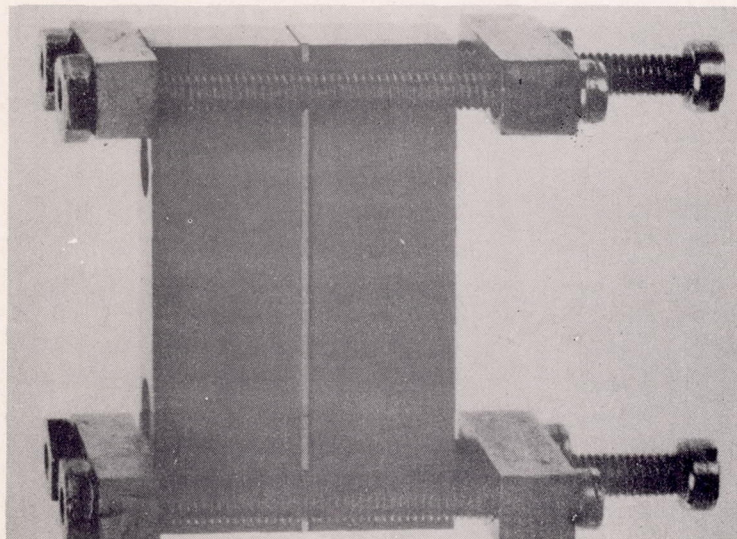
Improvised solid brass guide fixture for compressive tests of thin sheet metal.
